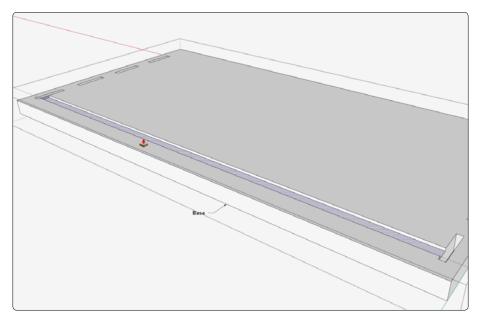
Draw line at the intersection of the back panel with the top face of the bottom.
